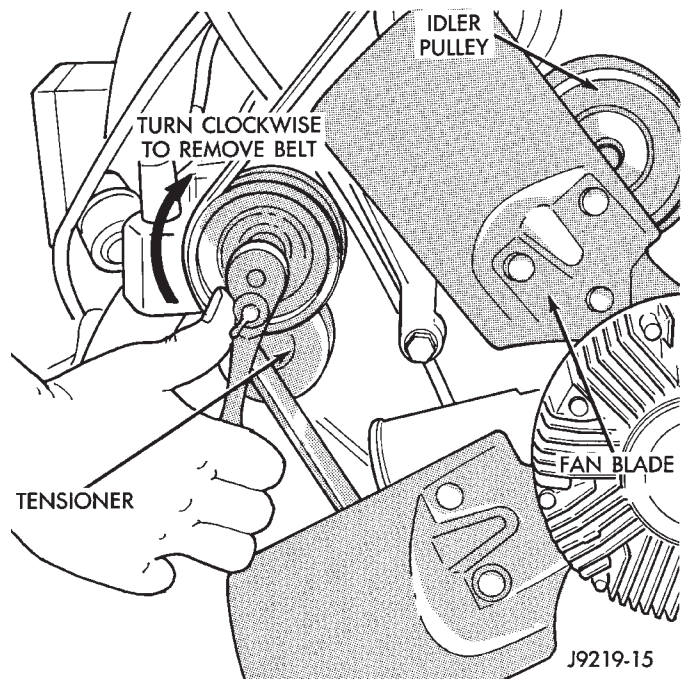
Belt Tensioner Assembly—5.2L Engine
